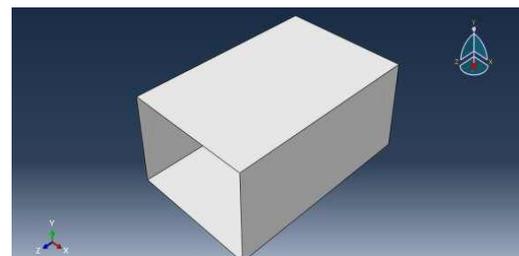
Crash Tube CAD model (Test no. 1)
